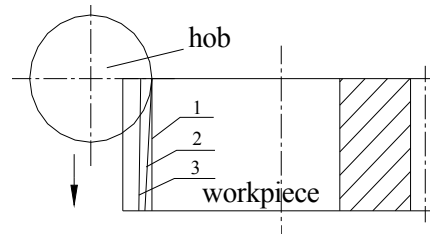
Tooth traces deviation of cutting gear of gear hobbing machine: 1- ideal machining locus, 2- machining locus before heat balance, 3- machining locus in the heat balance.
